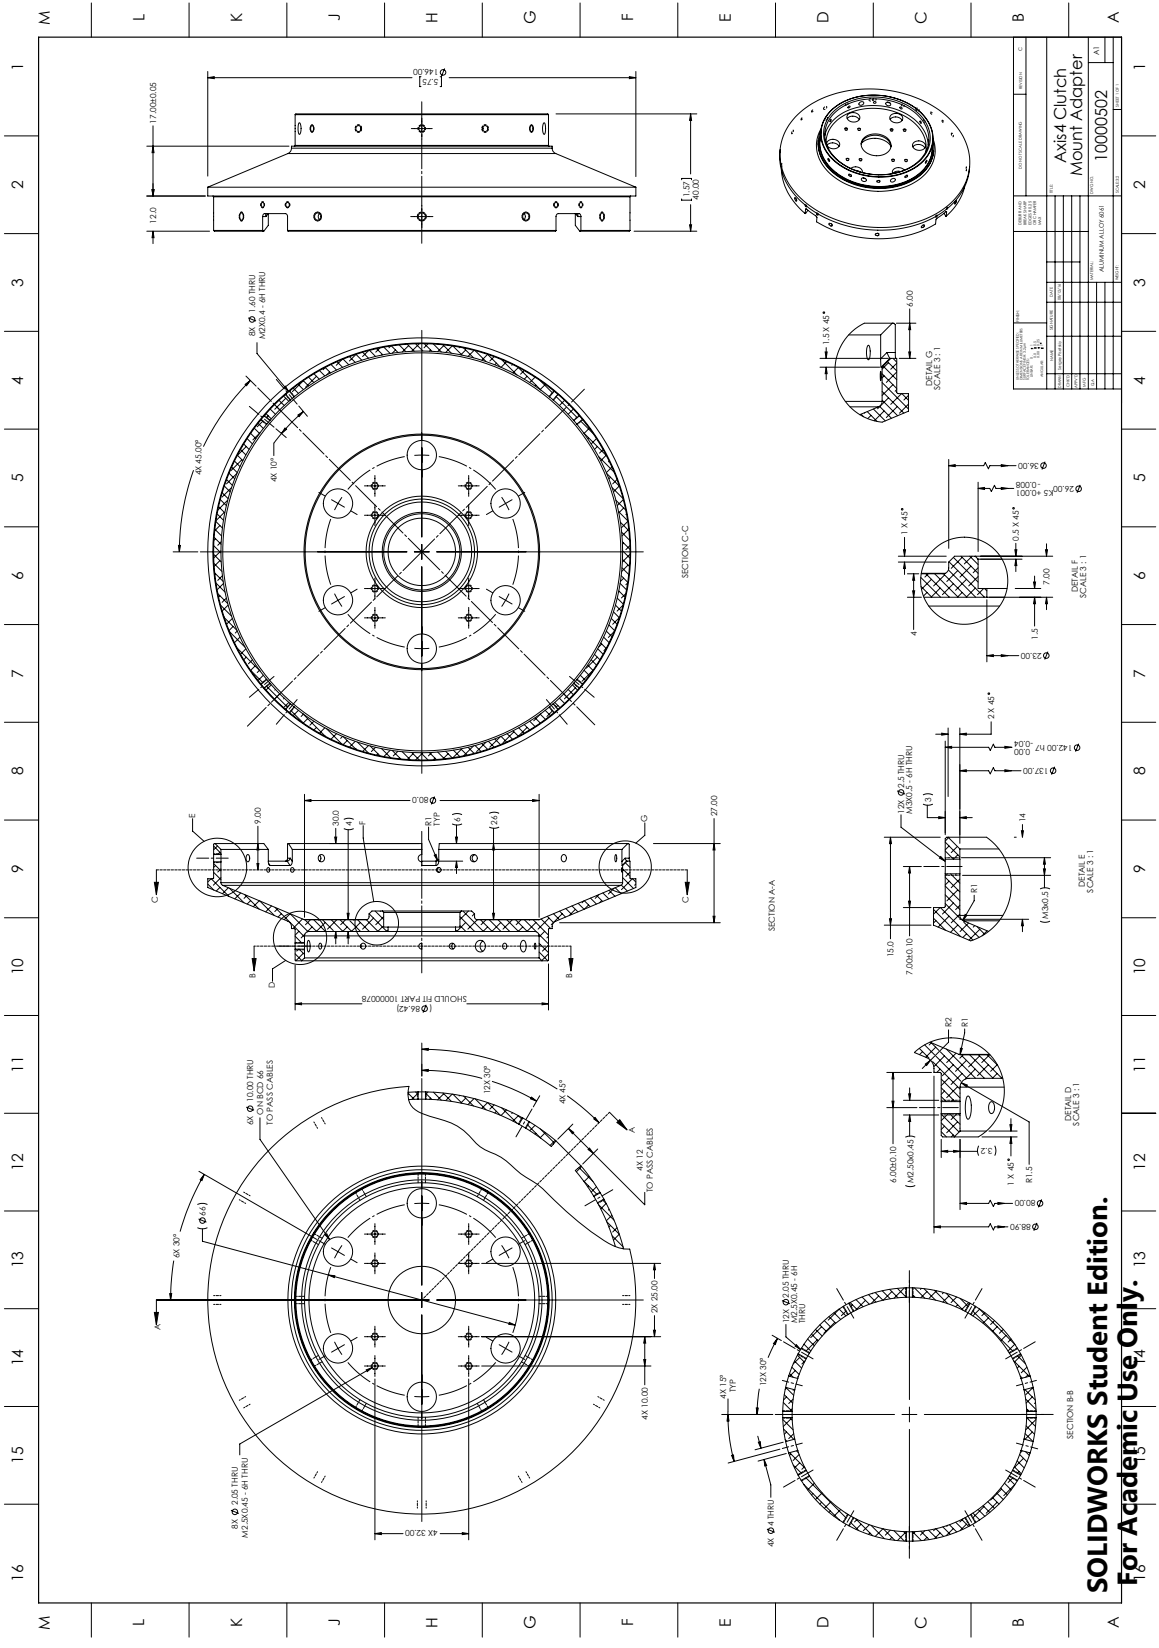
Drawing: Joint 4 clutch mount adapter.
